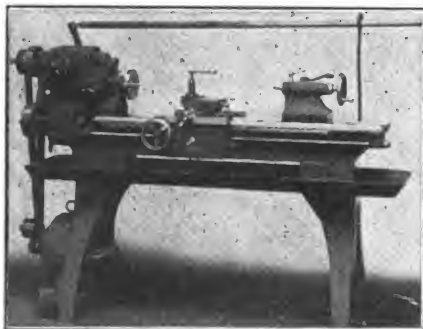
THIS TYPE IS MOTOR DRIVEN
